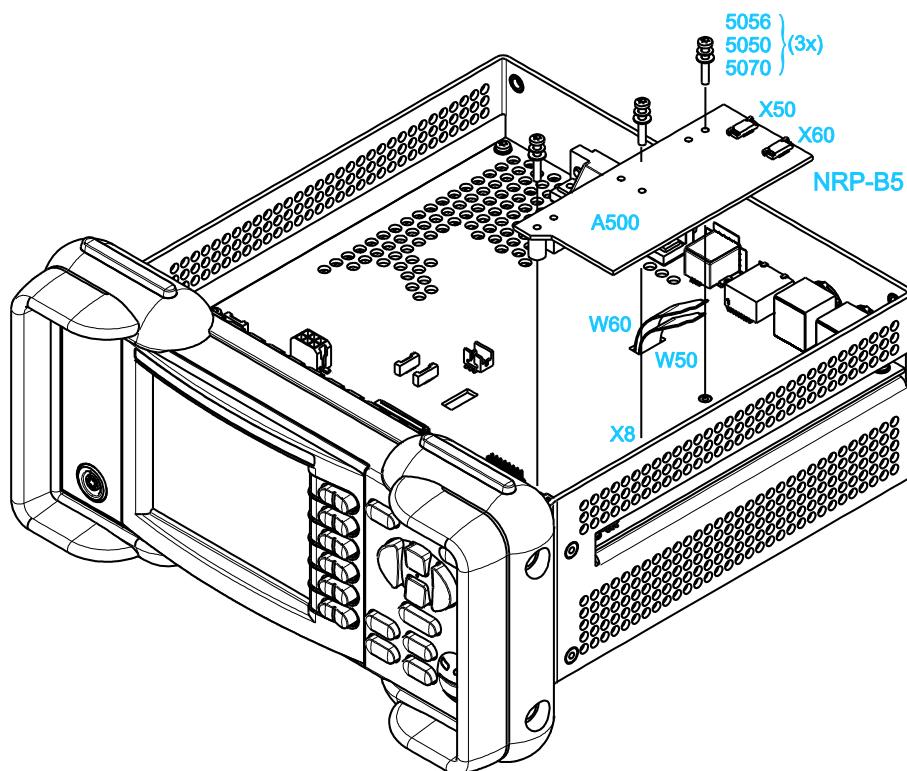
Removing and installing the 3rd and 4th test input (board A500)
